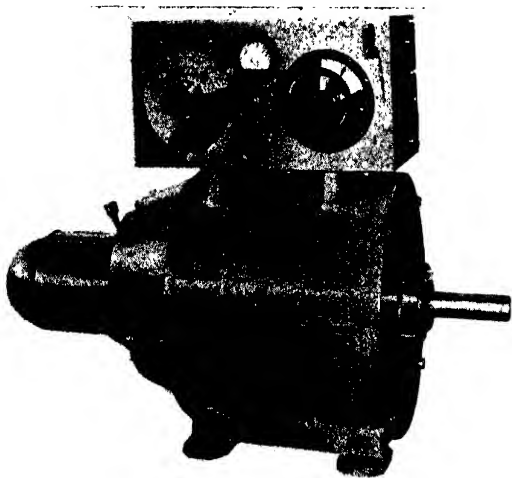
A D.C. WELDING GENERATOR AND CONTROL PANEL
